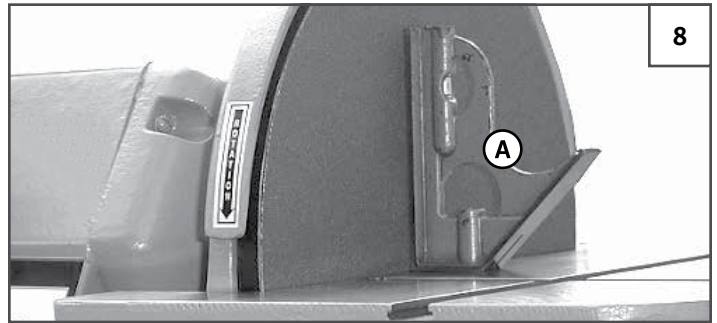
SETTING SANDING DISC TABLE ANGLE
